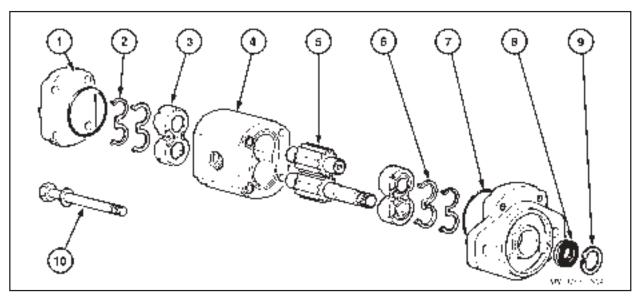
HYDRAULIC PUMP - EXPLODED VIEW
